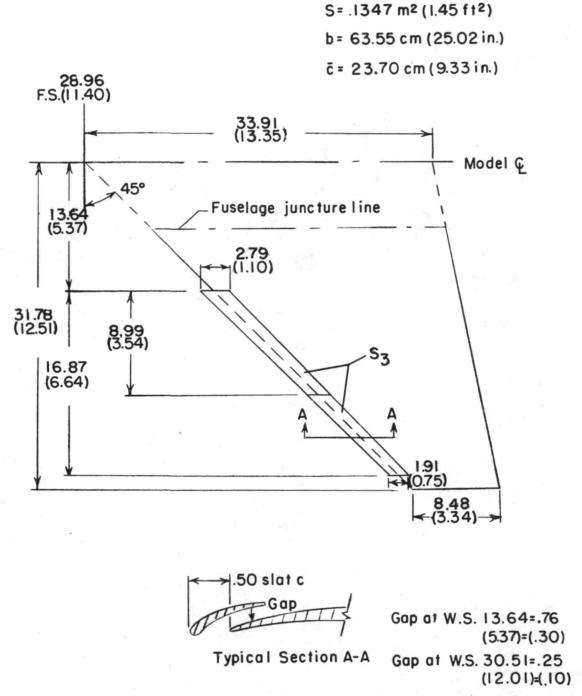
Details of configuration 3 wing with leading-edge slats. (Linear dimensions in centimeters (inches).)
